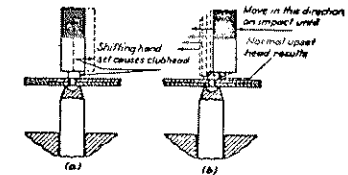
HAND-SET OPERATIONS. (a) RESULT OF SHIFTING HAND SET (b) CORRECTING AN OFF-CENTER (CLUB-HEAD) RIVET WITH A FLAT HAND SET
